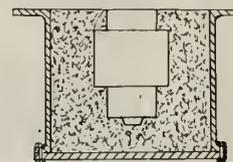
DRAG PART ON LOWER END OF COLUMN.
